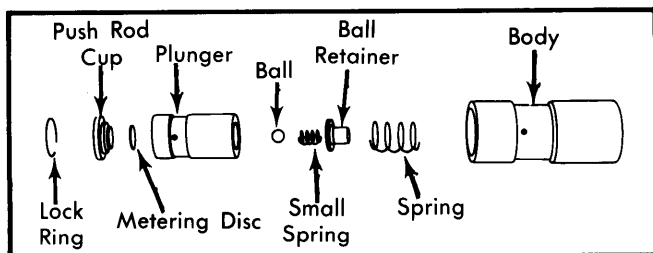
Exploded View of Hydraulic Lifter Assembly
